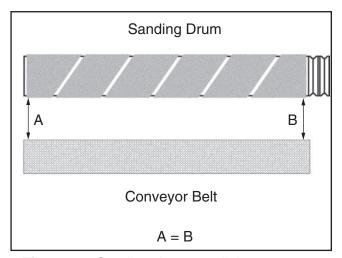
Sanding drum parallel to conveyor belt (viewed from front of machine).
